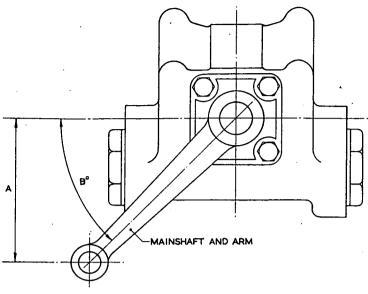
FIG. I. NO LOAD SETTING OF MAINSHAFT AND ARM.
